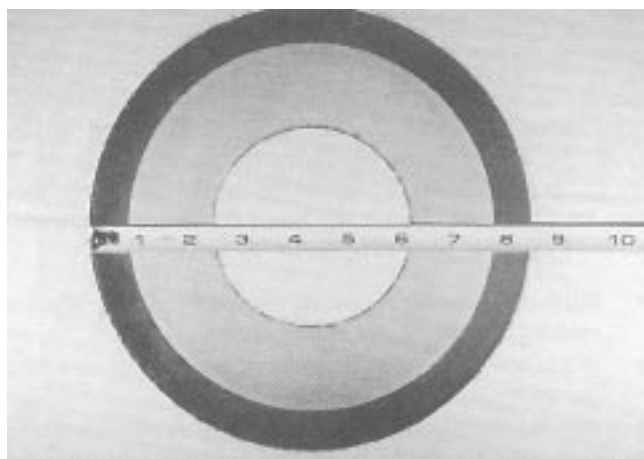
Cross section of Casting 10 at mid-length, showing uniform SS310 outer layer and T-11 inner layer. The stainless layer appears darker than the T-11 layer because of dark-field photography of the macroetched ring. 0.26×
